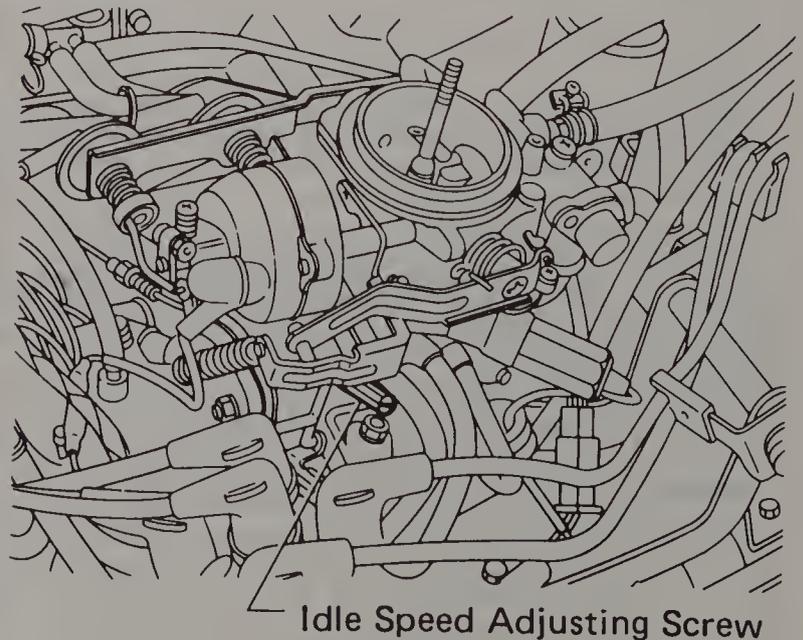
Idle speed adjusting screw location (typical) (Sec 17)
